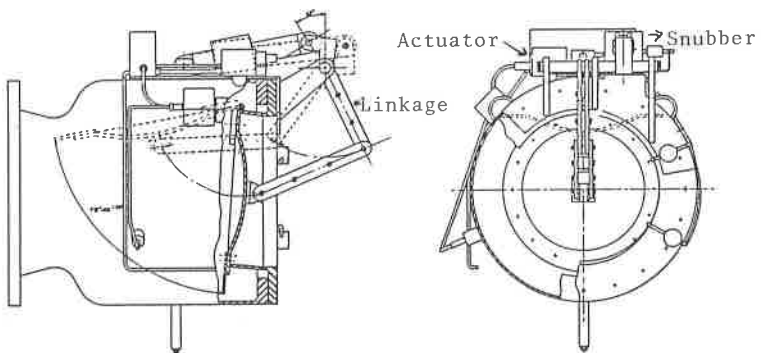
MODIFIED VERSION OF VACUUM BREAKER
